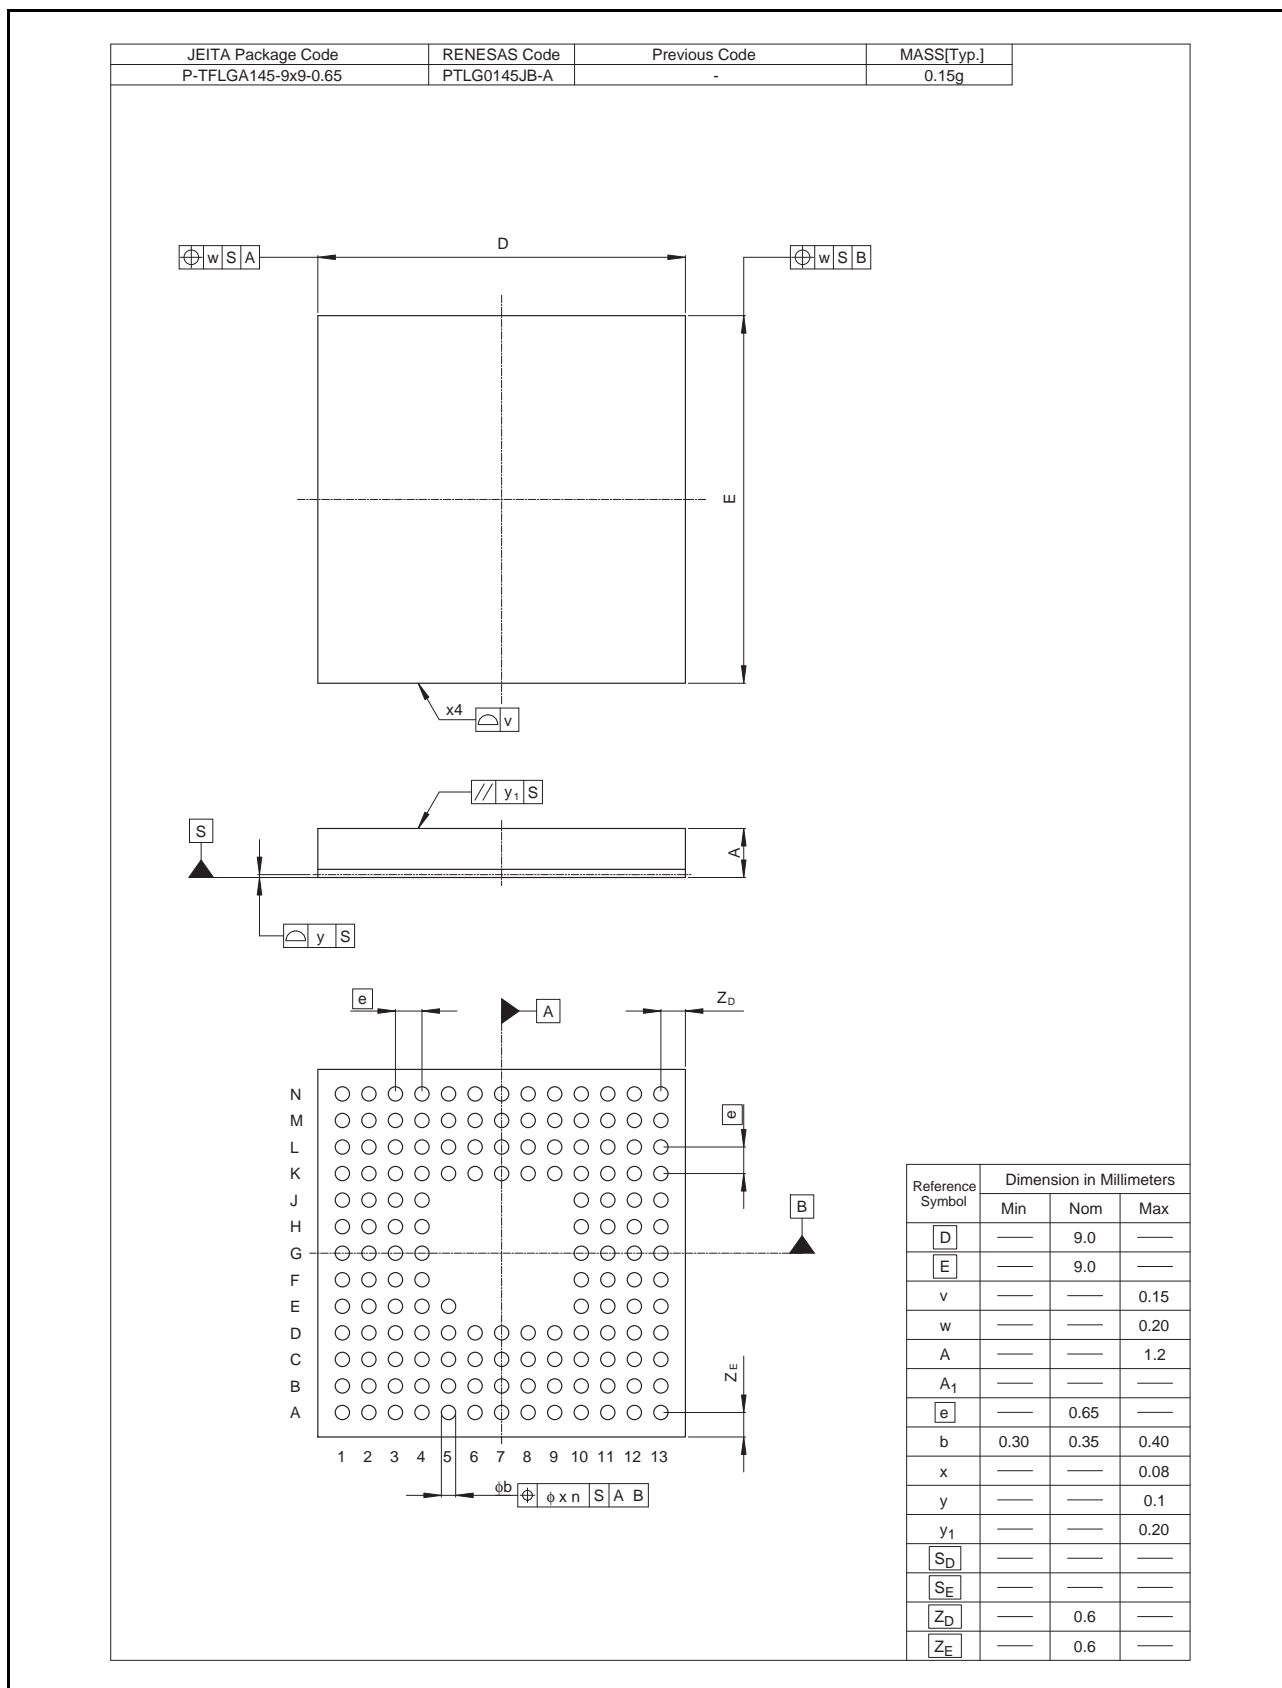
Pin TFLGA (PTLG0145JB-A) Package Dimensions
